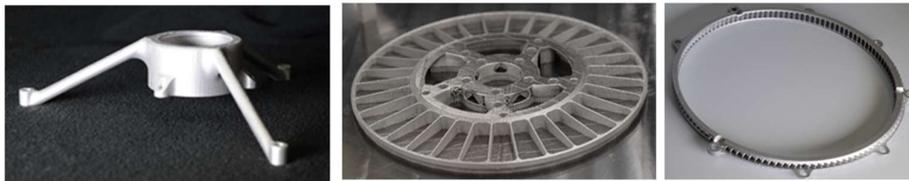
Additively manufactured metallic structural motor components include the housing (left), rotor (center), and finned stator cooling ring.
